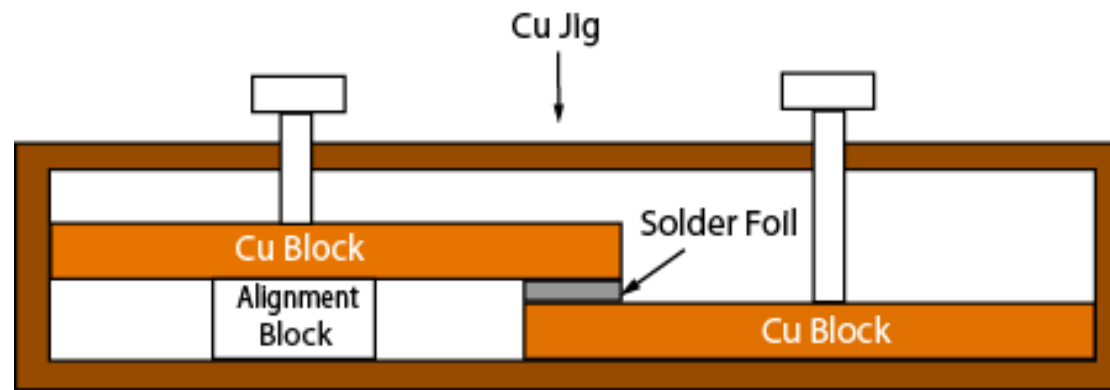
Schematic of Cu jig used for assembling lap-shear solder joint
